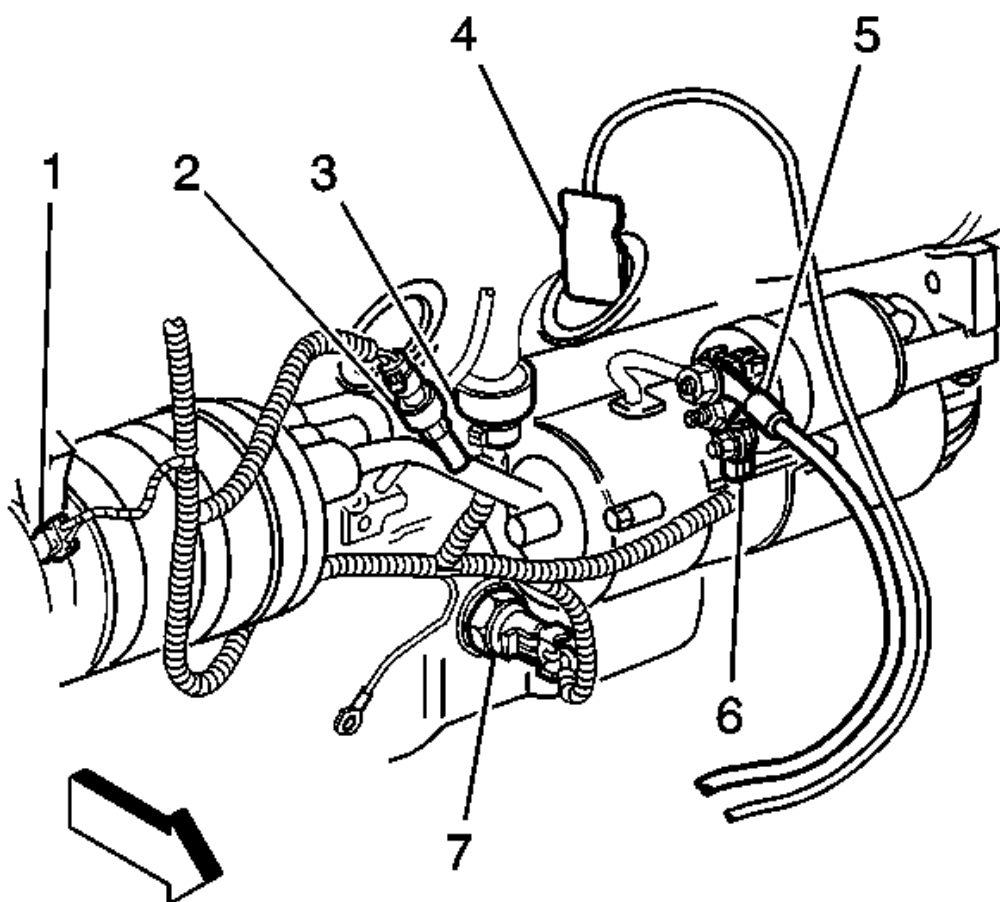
View of A/C Compressor Clutch, A/C Pressure Sensor, Knock Sensor, Engine Coolant Block Heater & Oil Level Sensor
